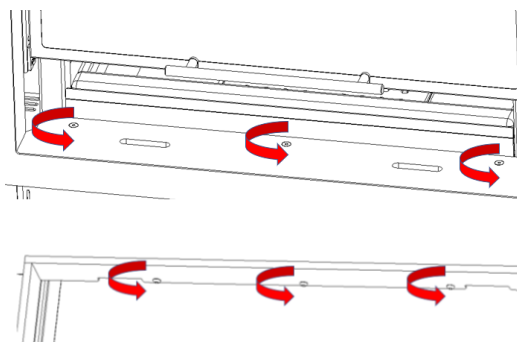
Unscrew the 6 screws, 3 lower and 3 upper that secure the exterior frame
